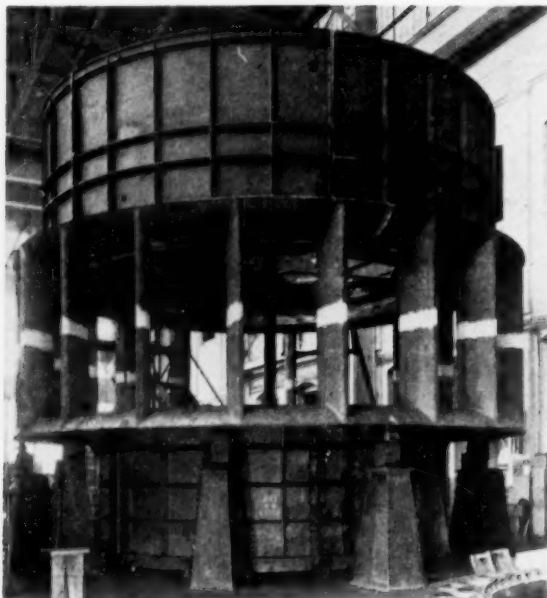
LARGE STAY RING OF WELD-FABRICATION
